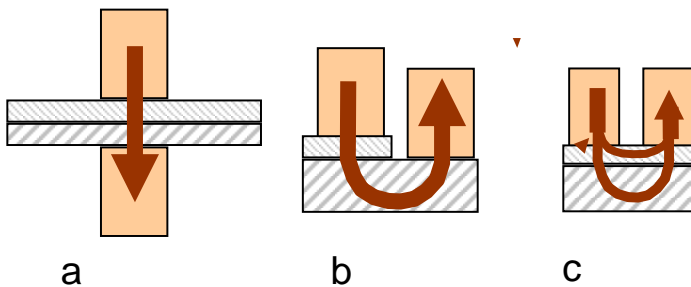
Examples of resistance welding electrode configurations: a. direct, b. step, c. series.
